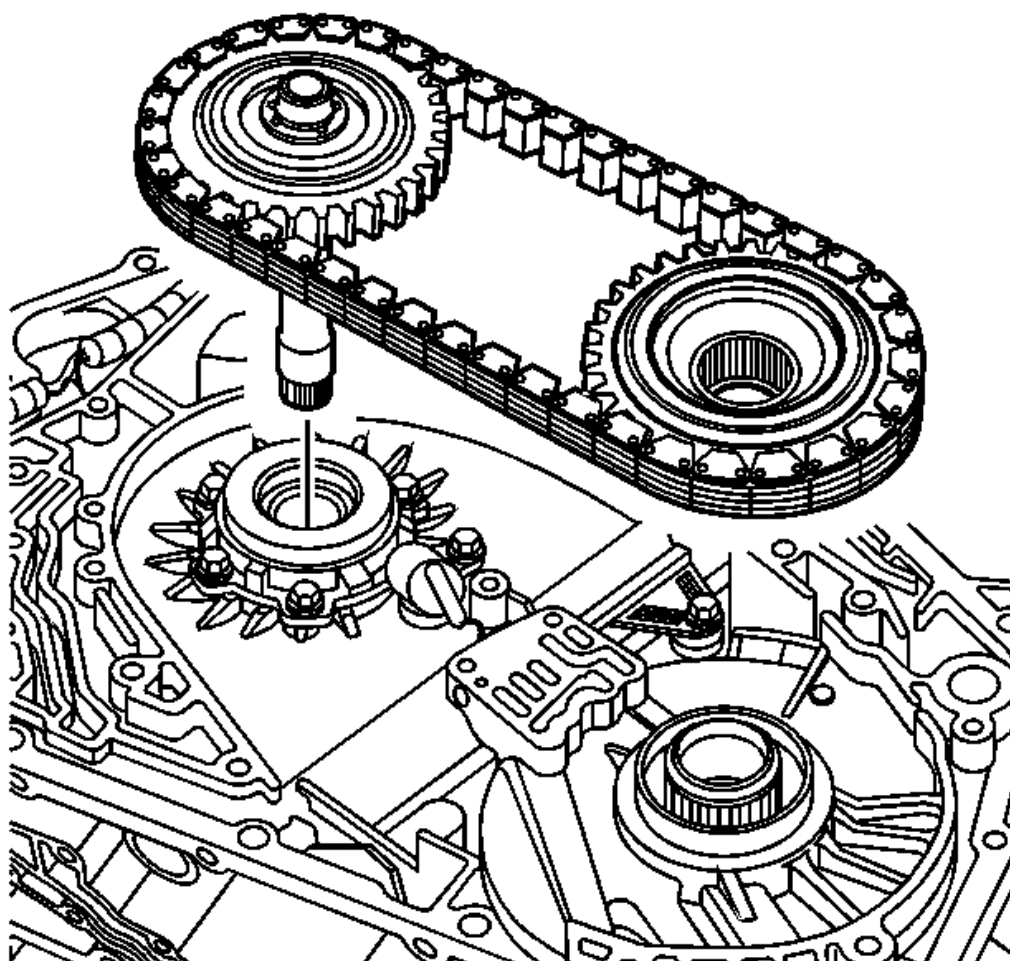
View Of Drive Chain To The Drive And Driven Sprockets
